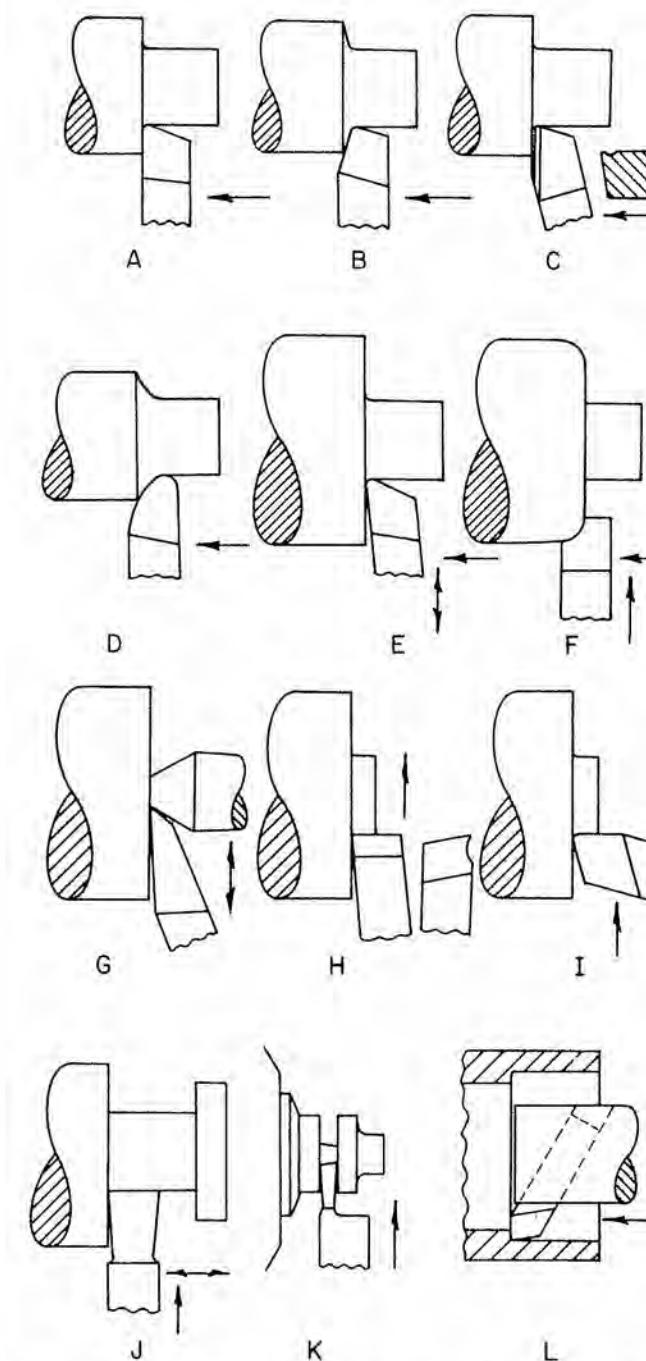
Typical tool shapes ground on high-speed tool bits and how they are used.
